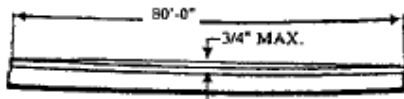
Side Elevation of Rail Uniform Upsweep Tolerance
